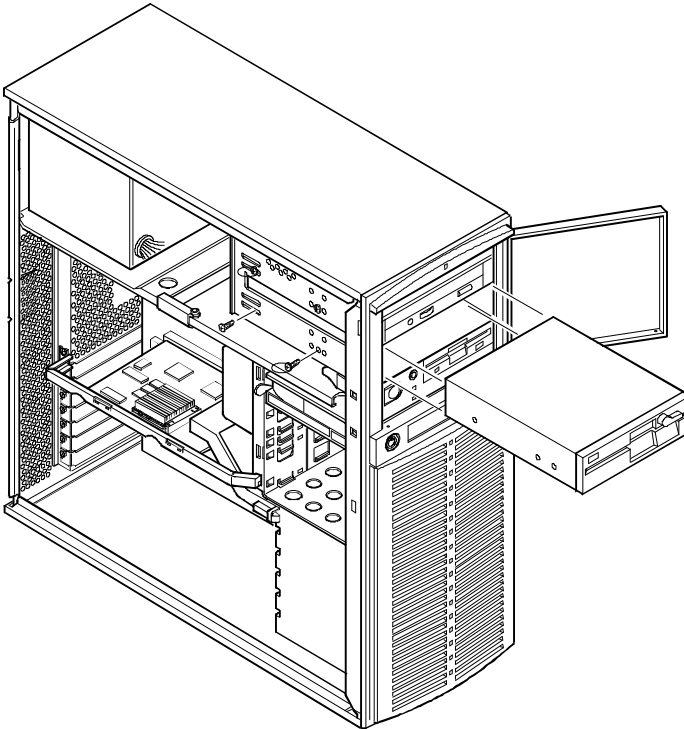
6 Removing the 3½-Inch Diskette Drive
